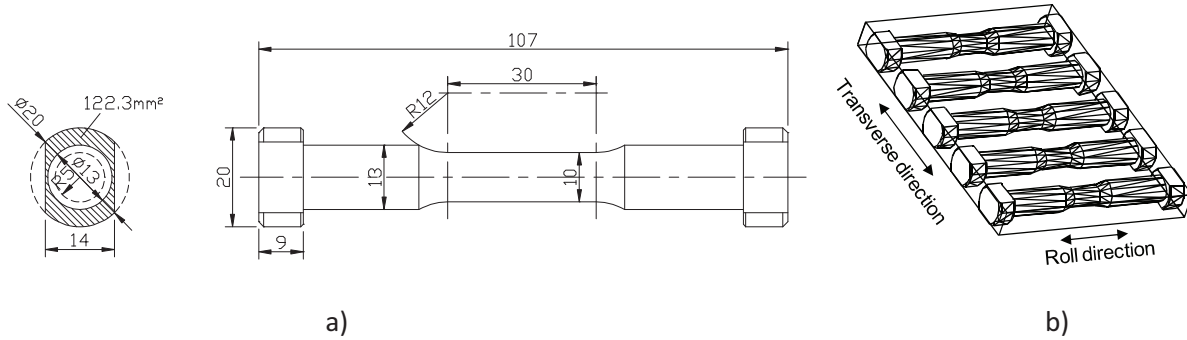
a) Sketch of the testing specimen, b) location of the specimens in the plate.
